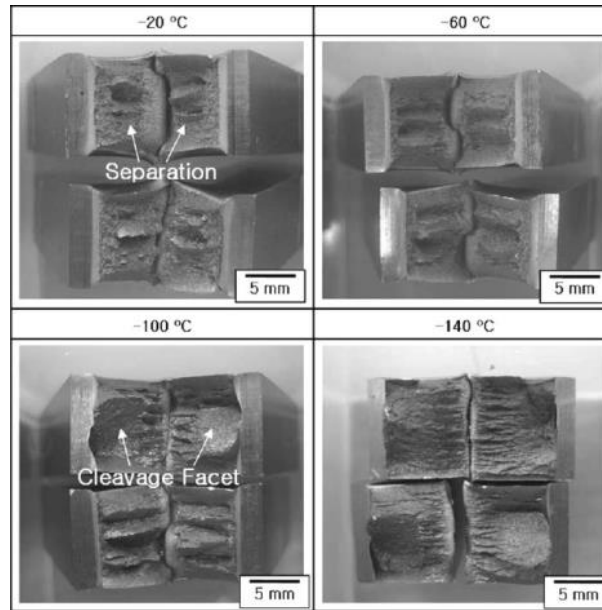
Charpy impact specimens fractured at -140°C to -20°C [218]
